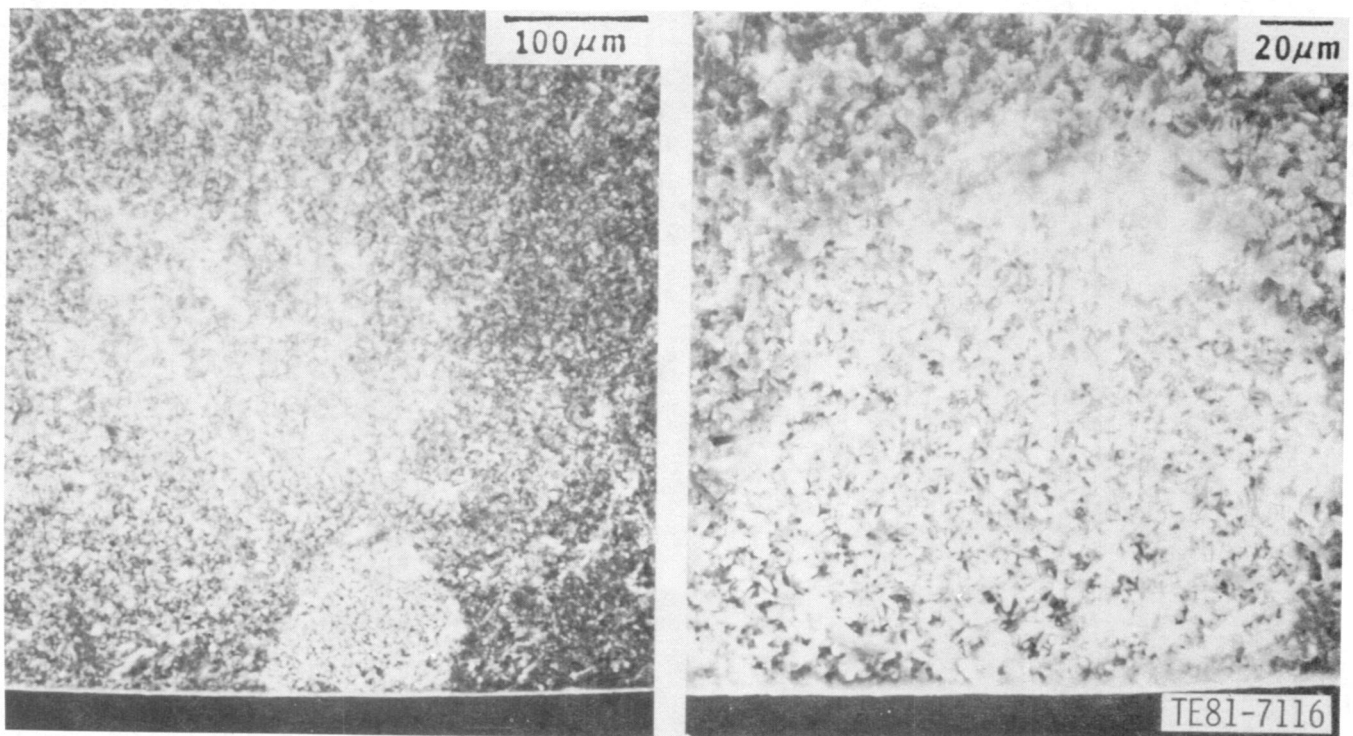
Fracture surface of NGK-Locke Si_3N_4 inner vane support ring test bar, showing large, low-density pocket.
